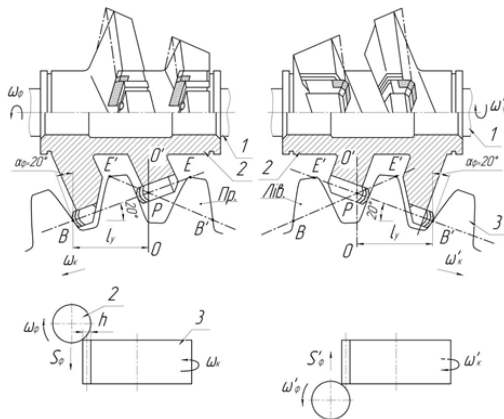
A scheme of processing wheel teeth with one right-hand cutter body: *a, c* – is a right - hand body during counter milling; *o, d* – is the right body during passing milling with a reversible direction of rotation of the cutter and the gear which is being cut
